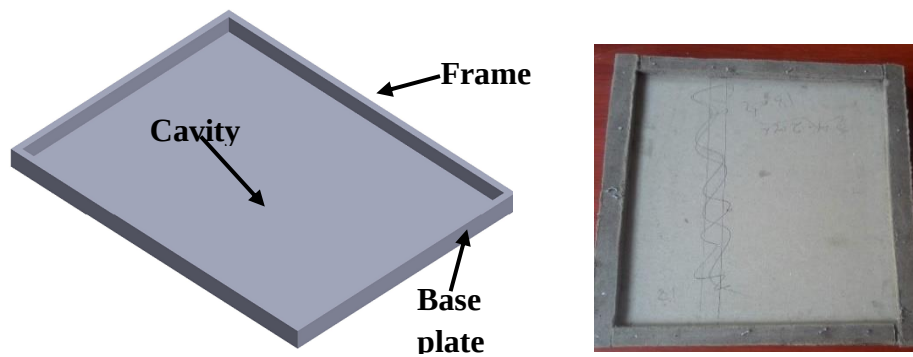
7 Wooden molds used for fabricating the composite specimens
